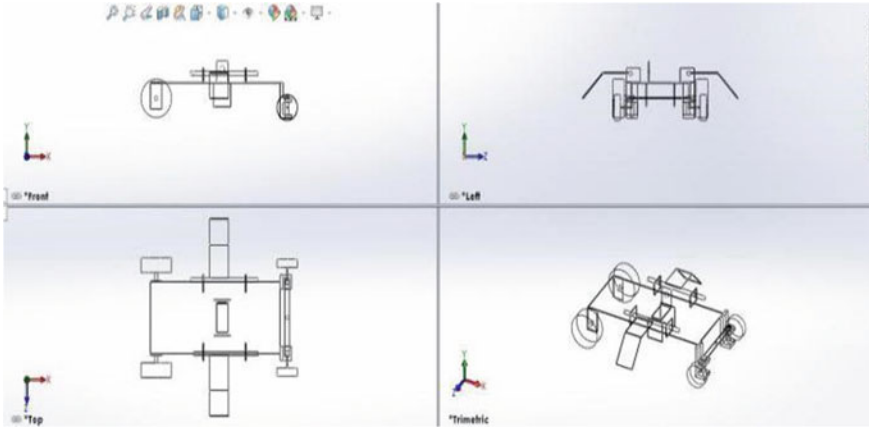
Wire frame model of magnetic plate handling truck parts and assembly
